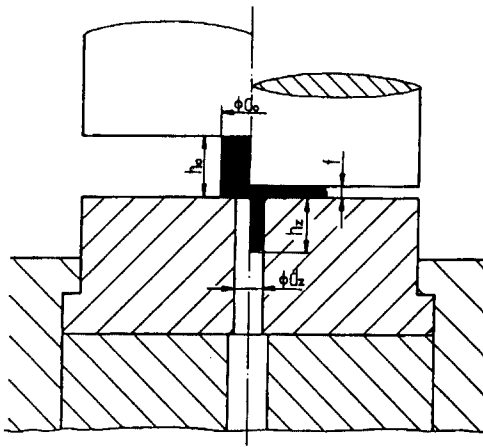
Schematic drawing for cold forging of a T-shaped workpiece
